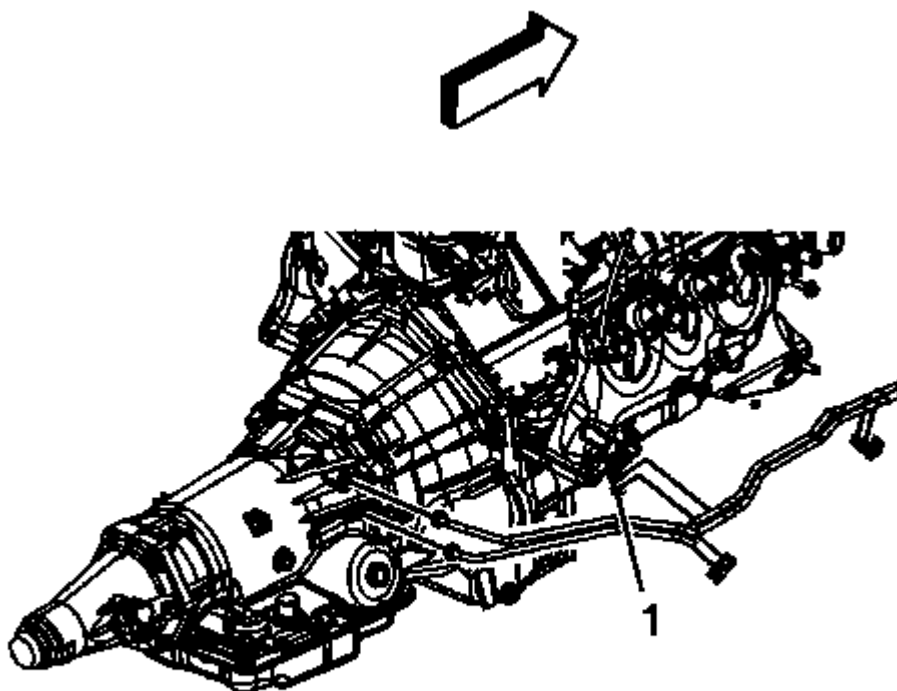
View Of Engine Wiring Harness Electrical Connector & Components
